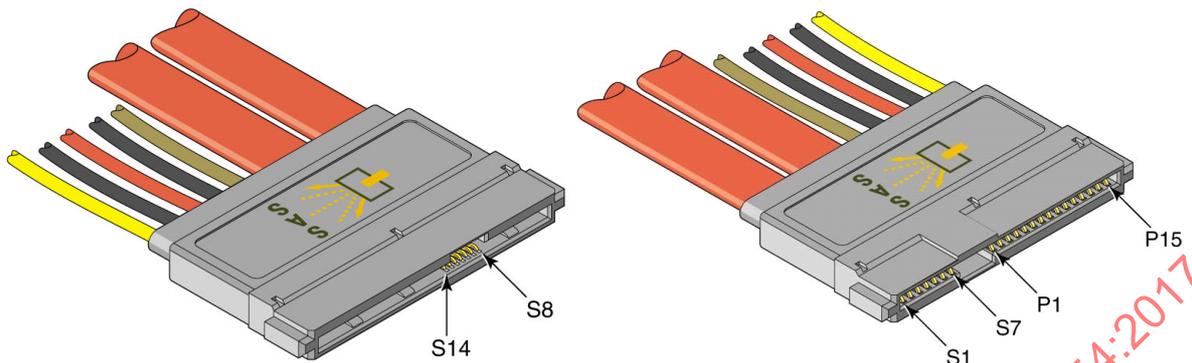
Single-port SAS Drive cable receptacle connector
